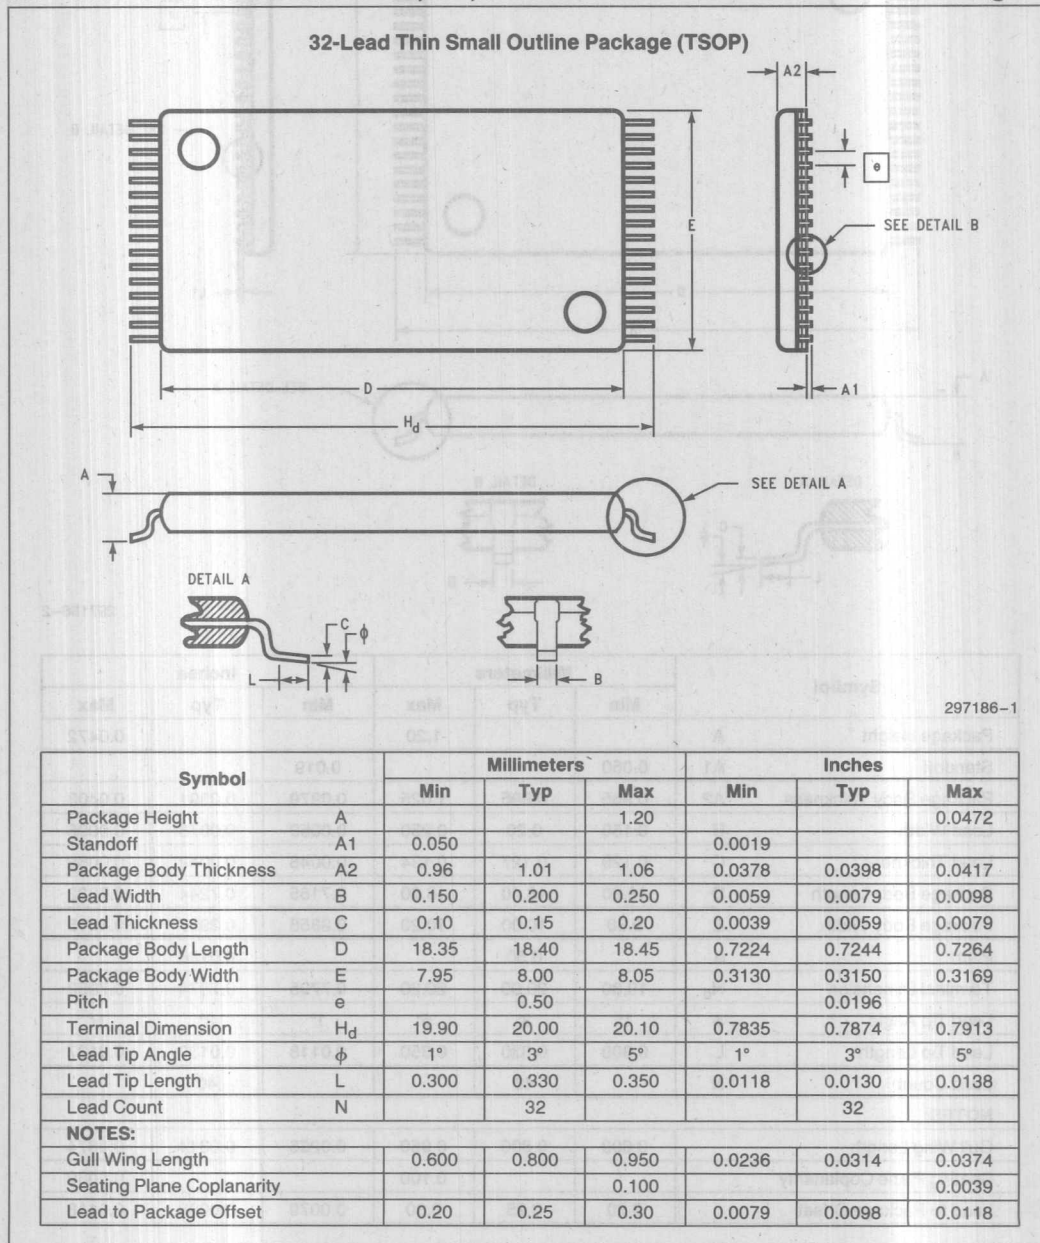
32-Lead TSOP Package Drawing and Specifications
